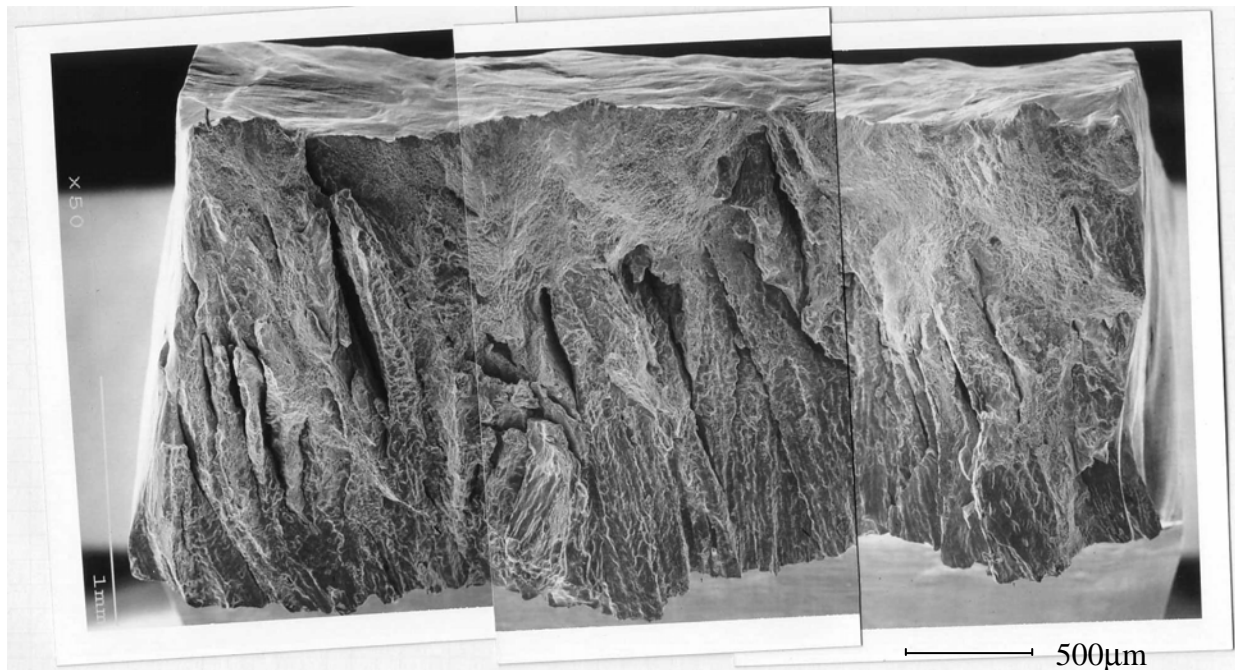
SEM microphotograph of the fractured surface of Alloy 82 weld metal of the SSRT test specimen (Temp.: 360 °C)
